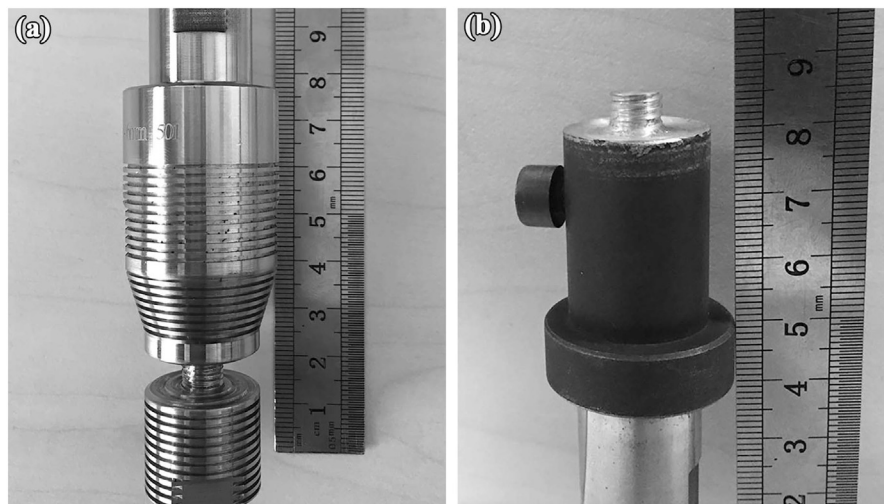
Picture of welding tools: (a) bobbin tool; (b) conventional tool.
